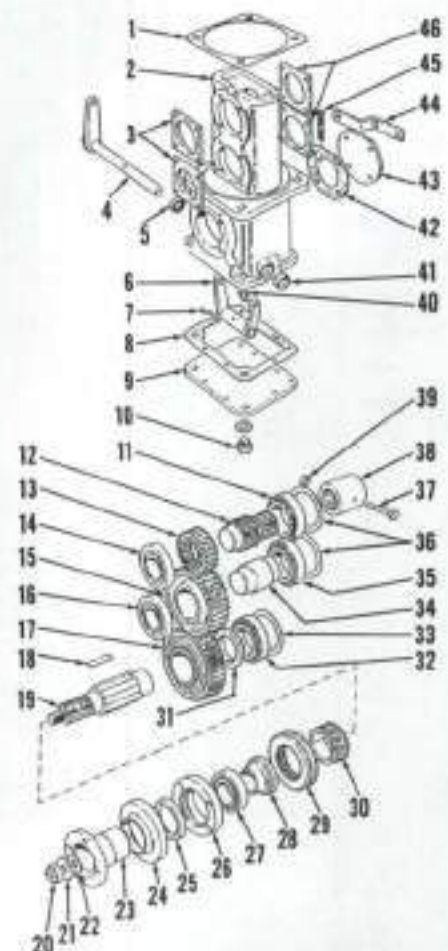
Exploded view of transfer gearbox used with David Brown front drive axle showing component parts and their relative positions.
